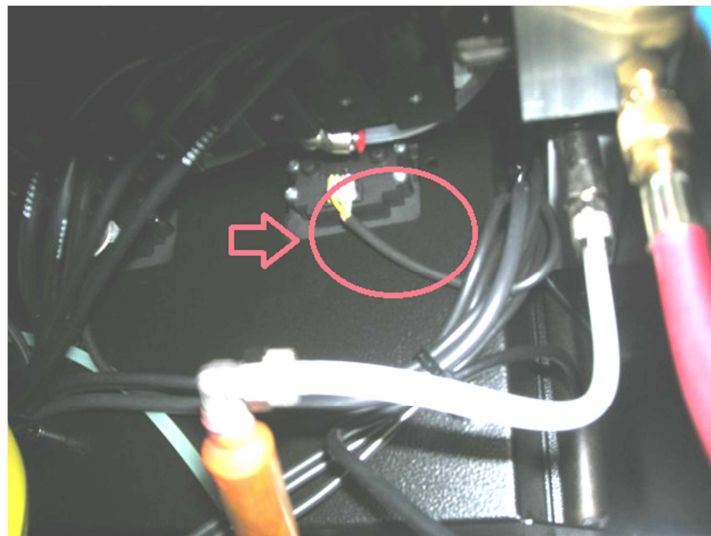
The cable which comes to the oil-injection bottle recognition connector (the same for the UV) could be too tight
